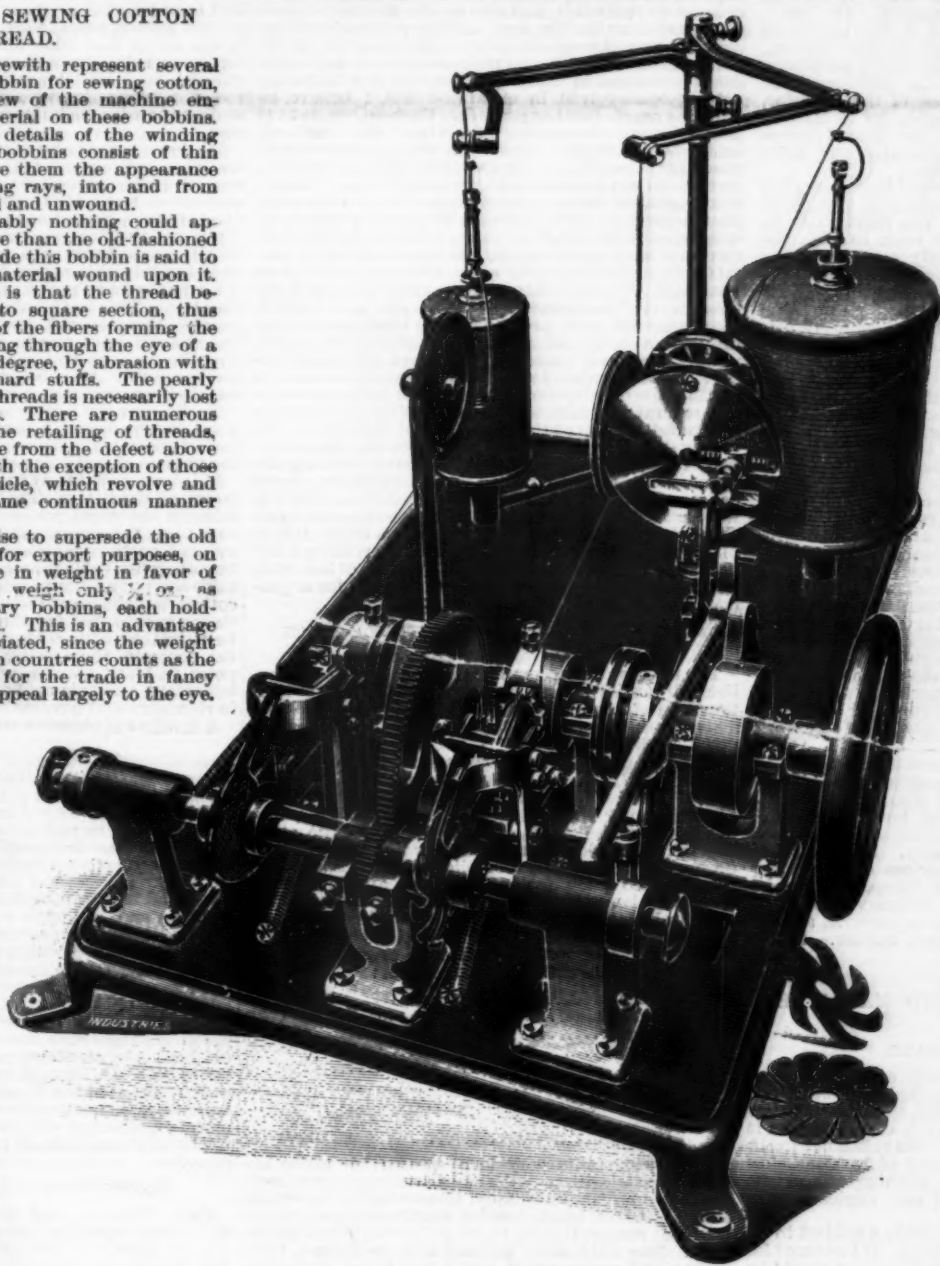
MACHINE FOR WINDING STAR BOBBINS.
